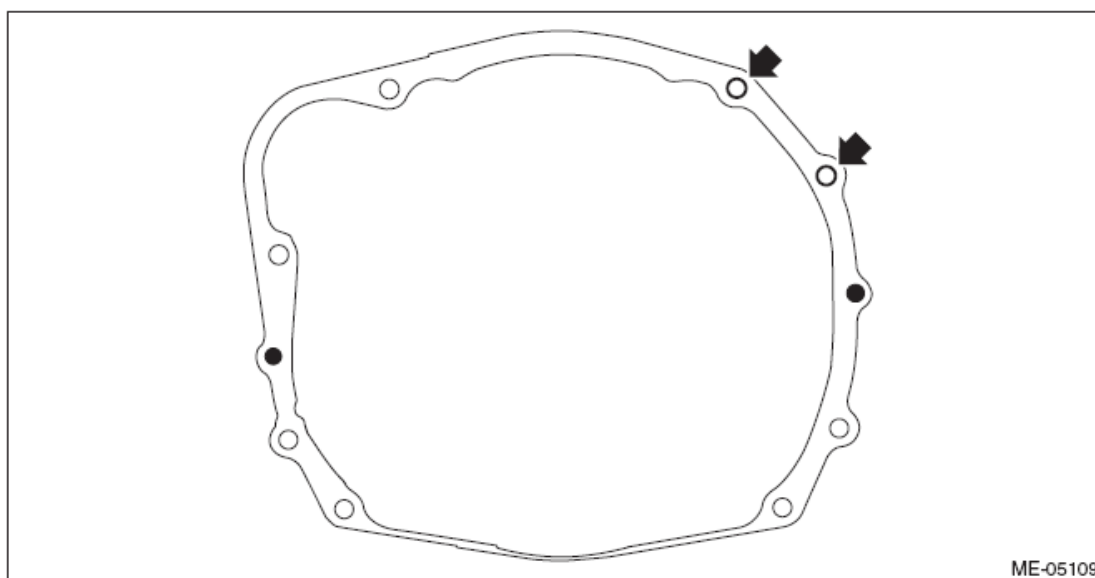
Locating Transmission To Engine Upper Side Bolts (MT Model)
